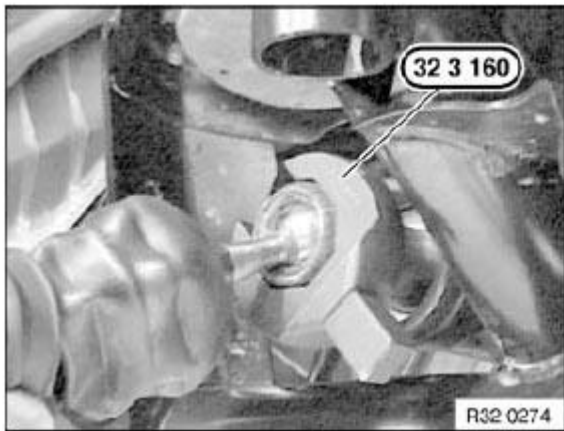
Unscrewing Tie Rod With Special Tool 32 3 160
